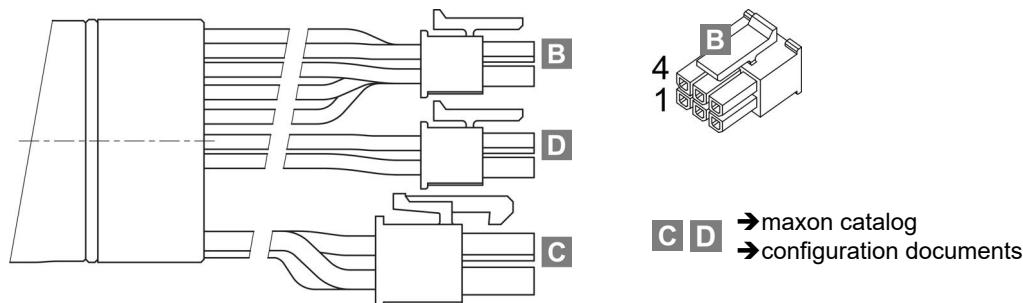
ENX 16 | 22 COMM (thermistor version) – Cable Plugs
